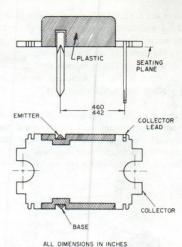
TO-219AA plastic transistor package designed for mounting on printed-circuit boards.
